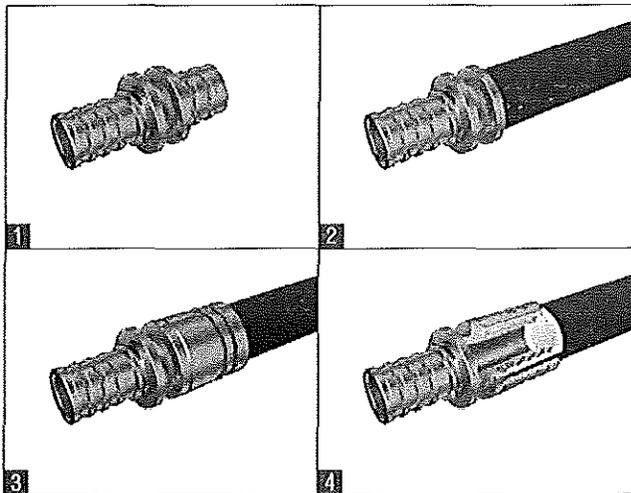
(1) EVERLOC fitting, (2) fitting inserted in expanded pipe, (3) REHAU EVERLOC joint, (4) cutaway
